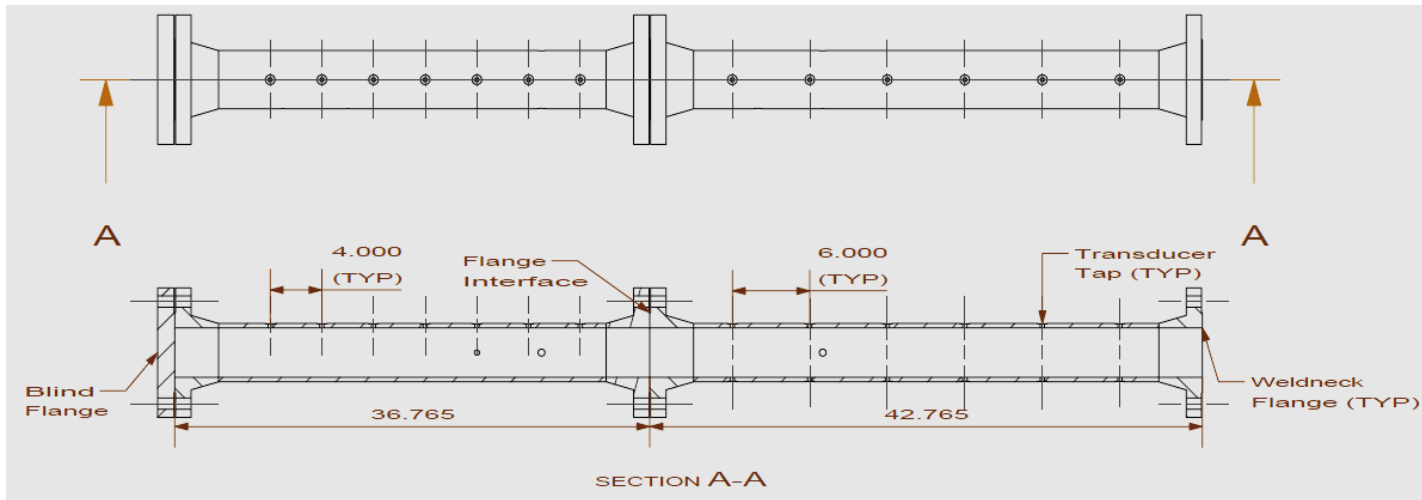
Machine drawing of the Phase 1 baseline. Dimensions in inches.
